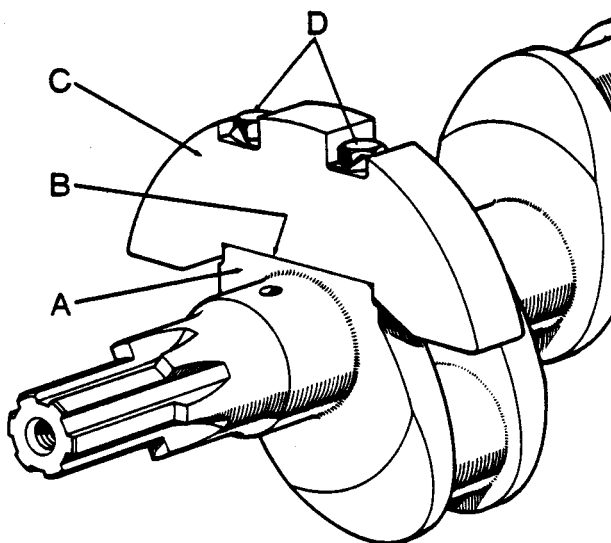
CHECKING BALANCE WEIGHTS AFTER INSTALLING
